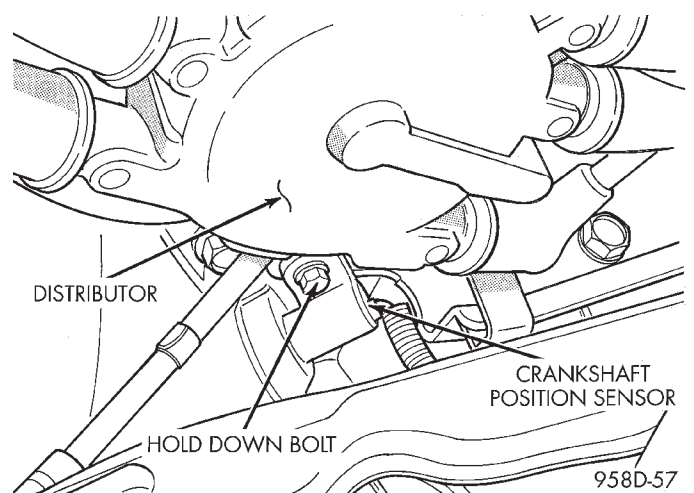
Crankshaft Position Sensor—2.5L Engine
